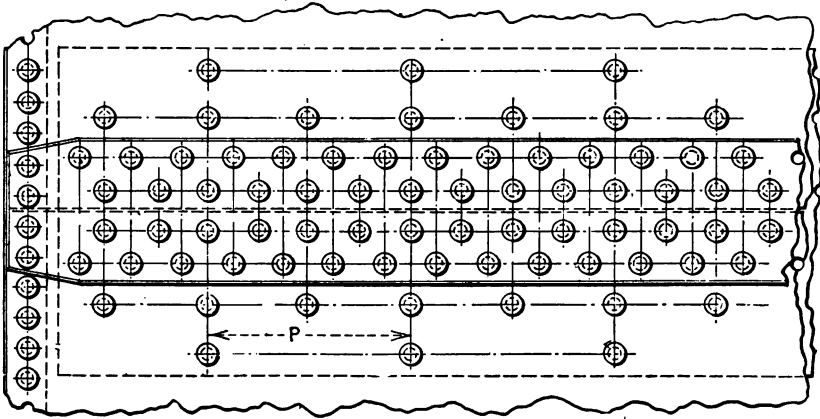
EXAMPLE OF BUTT AND DOUBLE STRAP JOINT, QUADRUPLE-RIVETED
